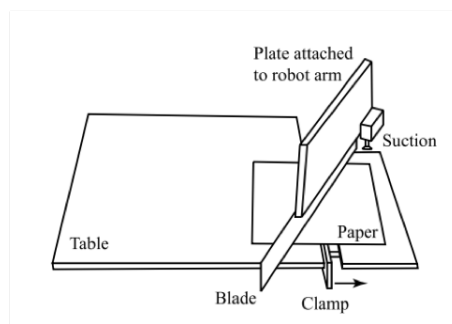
Paper Void Fill Machine (Source: GA Tech)
